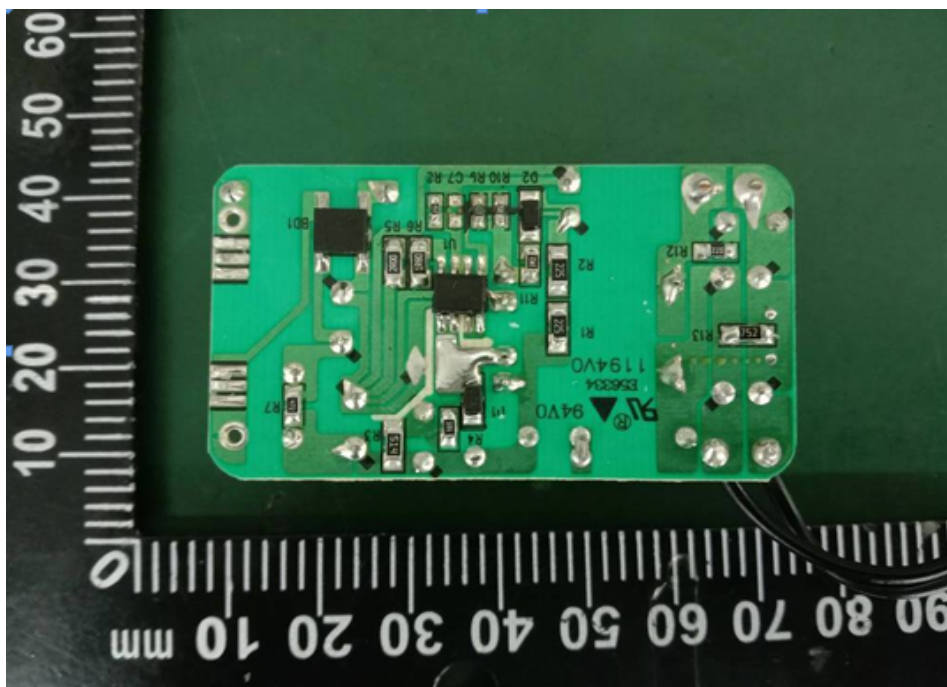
Bottom PCB view of the Class 2 Power Supply, model RSS1002-*-W2
